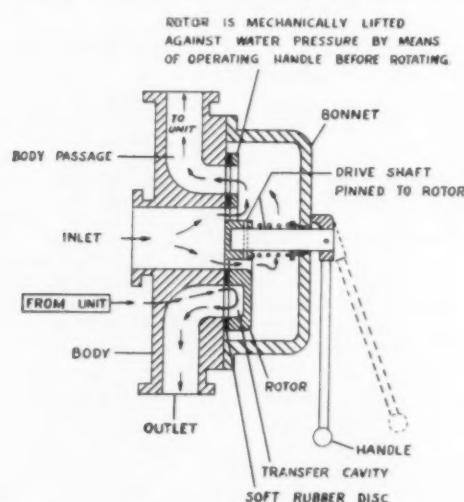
LIFT-TURN ROTARY MULTIPORT VALVE
